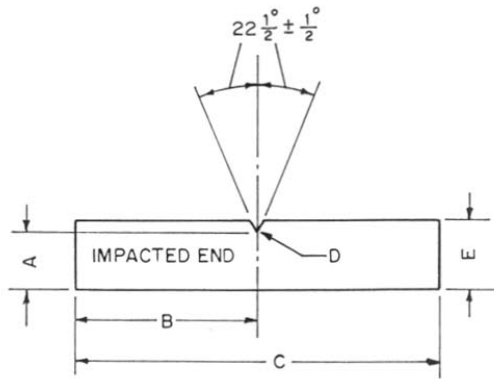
Shows the dimensions of Izod type notched impact specimen
